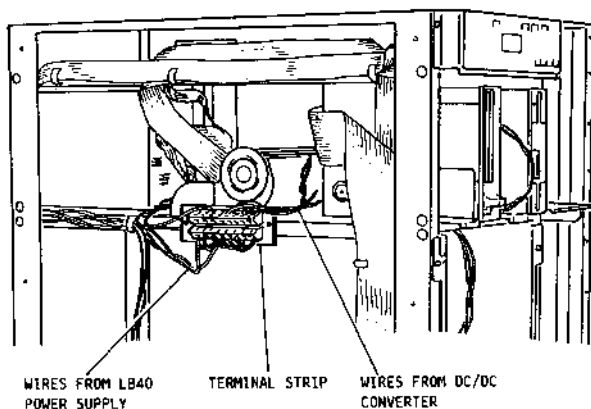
Side View of Terminal Strip for DC/DC Converter Power
